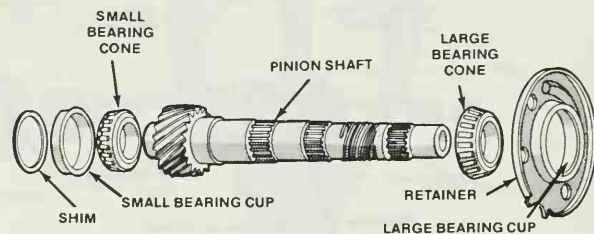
A disassembled view of the pinion shaft. (Chrysler Corporation)
